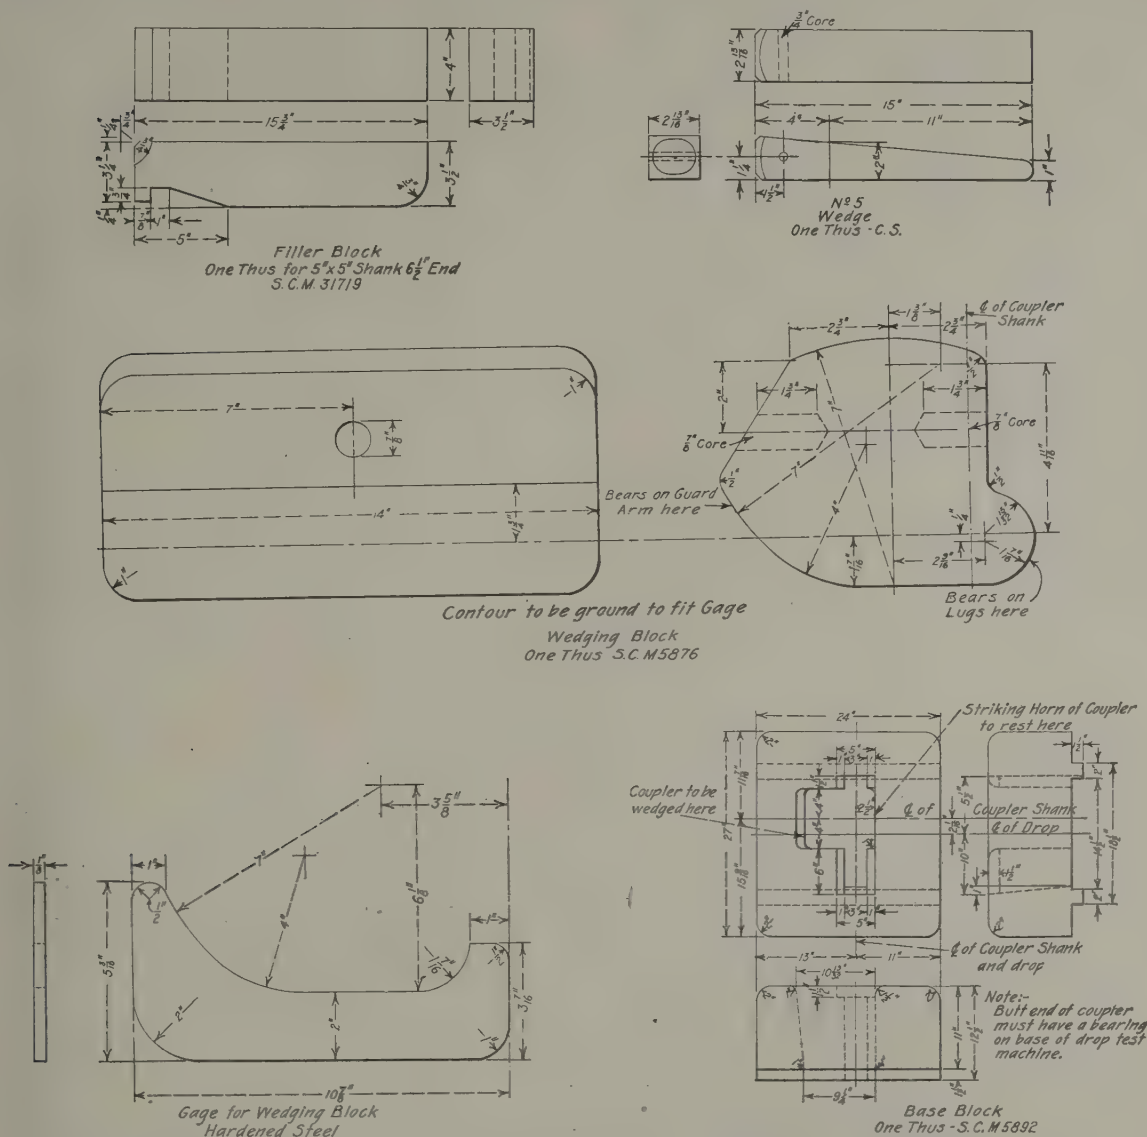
Details for Standard Face Test for M. C. B. Couplers. (M. C. B. Sheet 29 C.)
